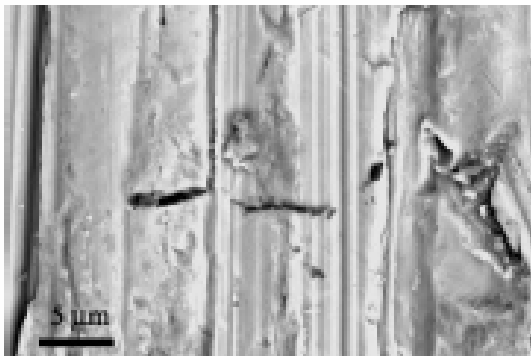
Magnified view of the fretting fatigue crack indicated by the righthand box in Fig. 14.
